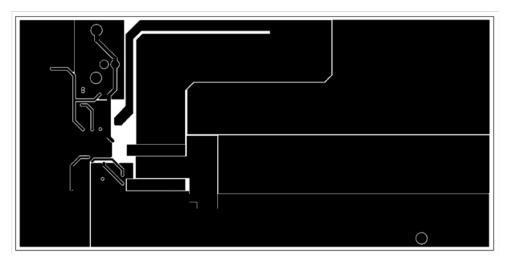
ISL8106EVAL1Z - BOTTOM LAYER (SOLDER SIDE)
